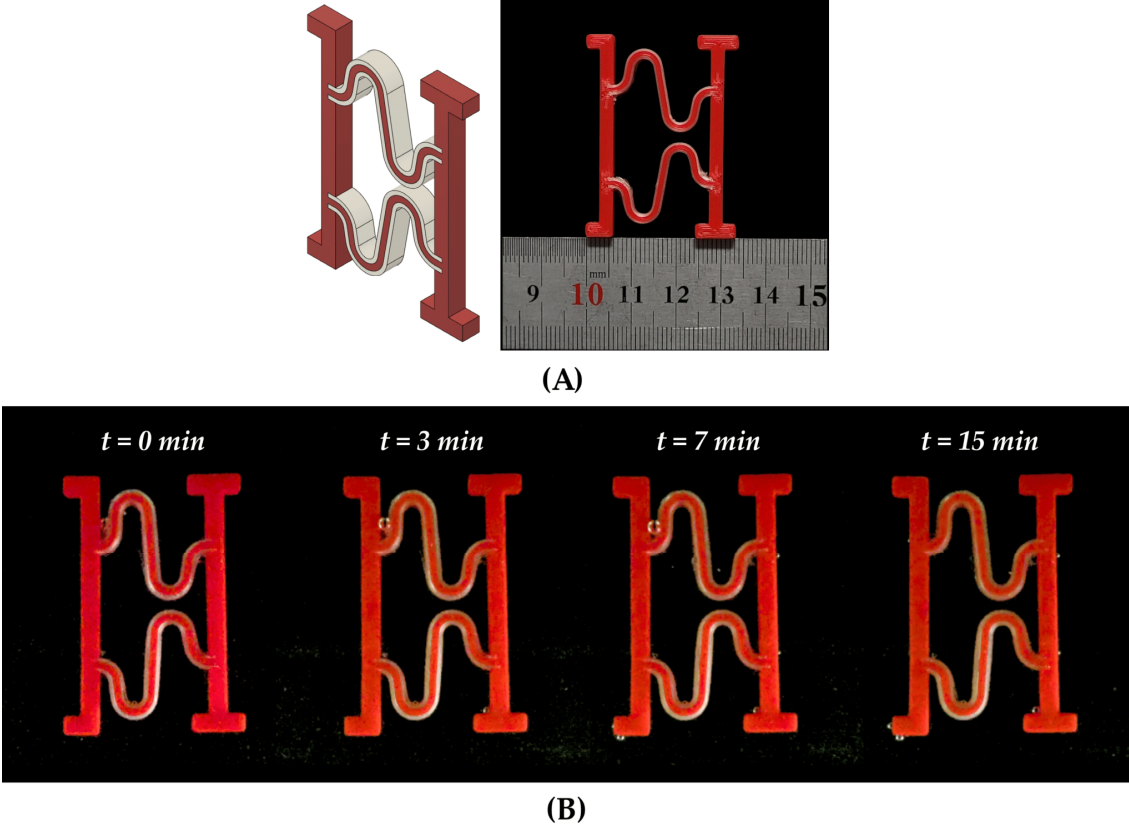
(A) CAD models & prototypes and (B) shape-morphing test for actuator 19.
